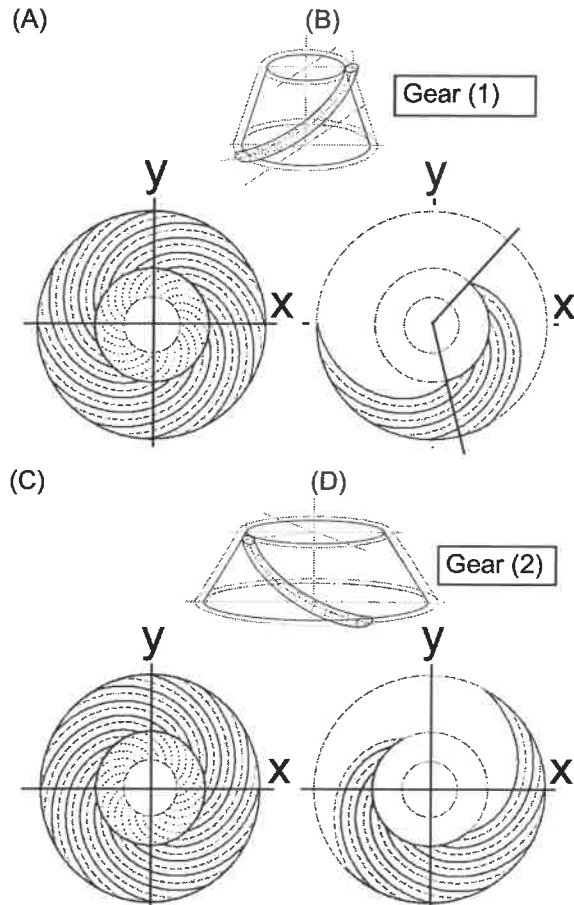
Circular sheets and fan-shaped sheets composed the spiral bevel gears.
